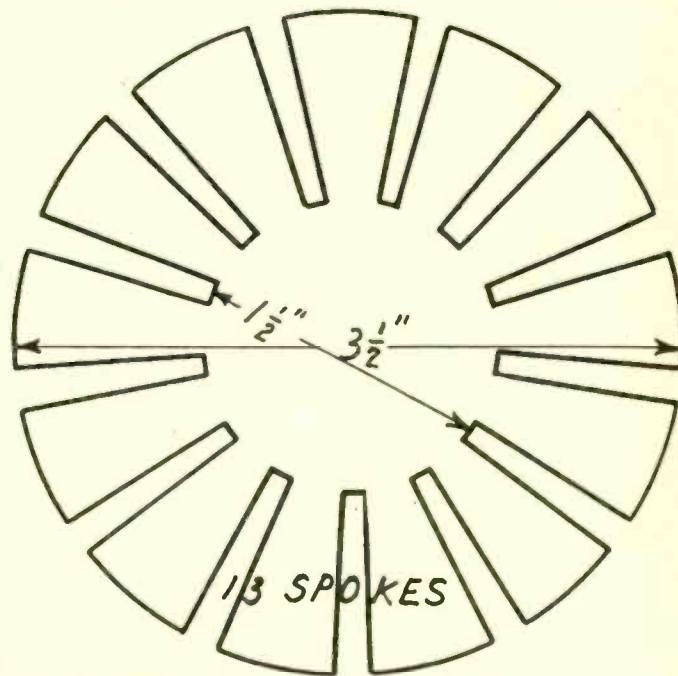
Former to be used for winding coils for the Ultradyne circuit. This illustration may be used as a cutting template.
